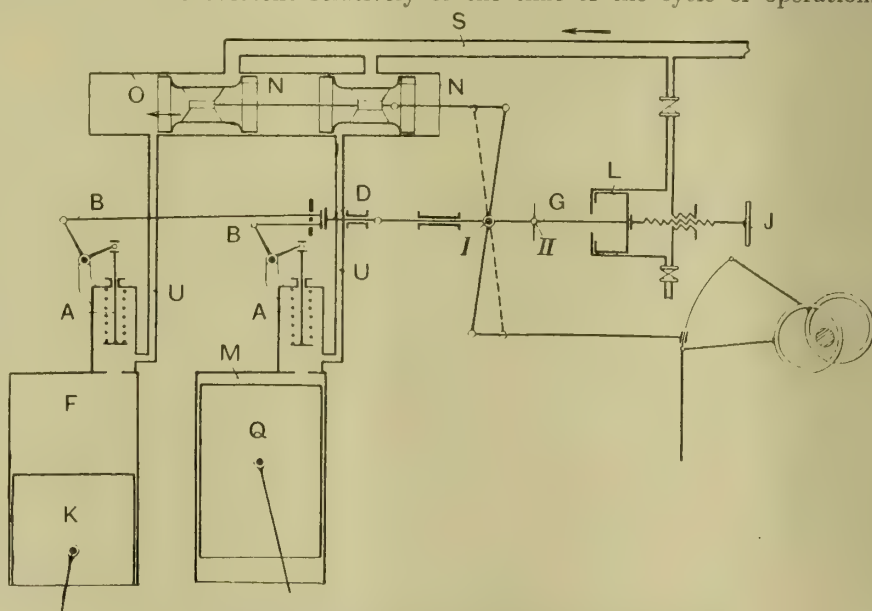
SULZER'S VALVE GEAR FOR INTERNAL-COMBUSTION ENGINES.
